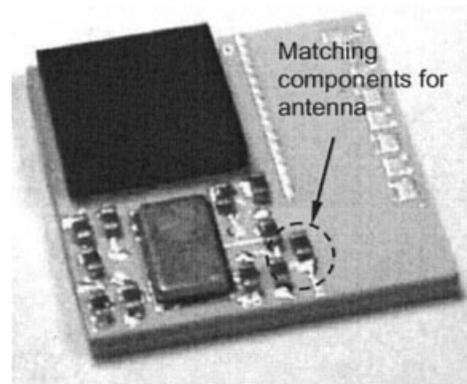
The prototype LTCC Bluetooth module with surface-mounted components.
